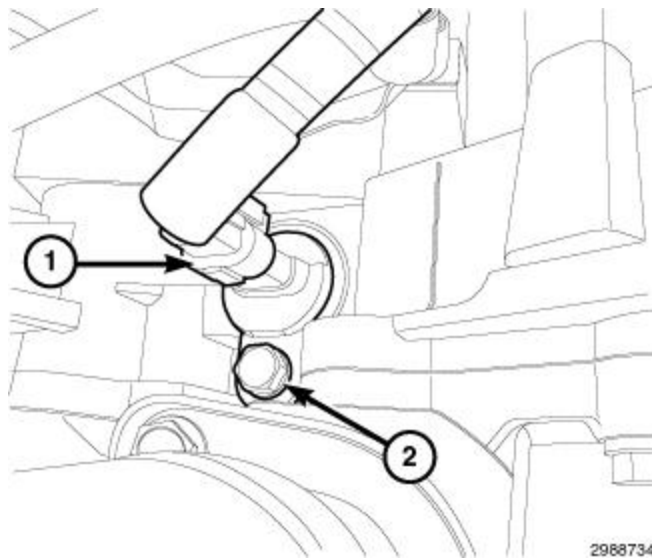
Camshaft Position Sensor Electrical Connector & Bolt
